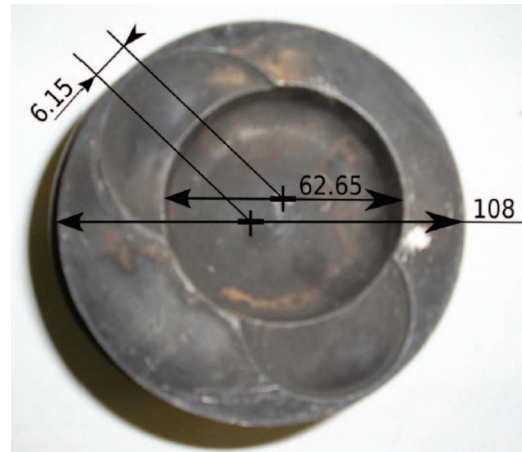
Engine Piston with Main Dimensions (in mm) and Eccentrically Positioned Hole
